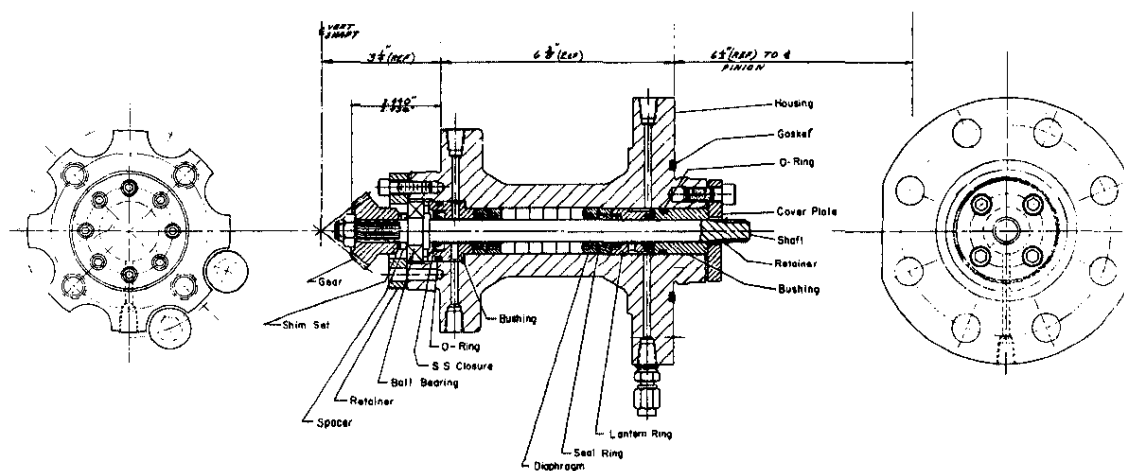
CROSS-SECTIONAL VIEW OF SEAL ASSEMBLY
